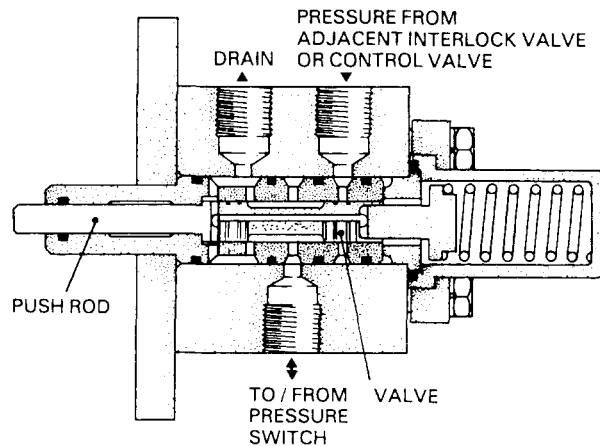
KEEP AND LATCH INTERLOCK VALVE
